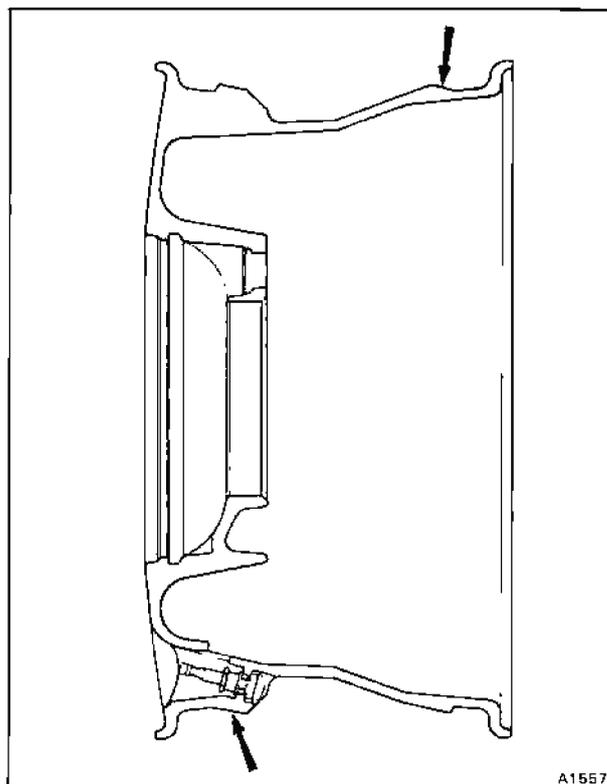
Sectional view of Bentley Turbo R wheel
